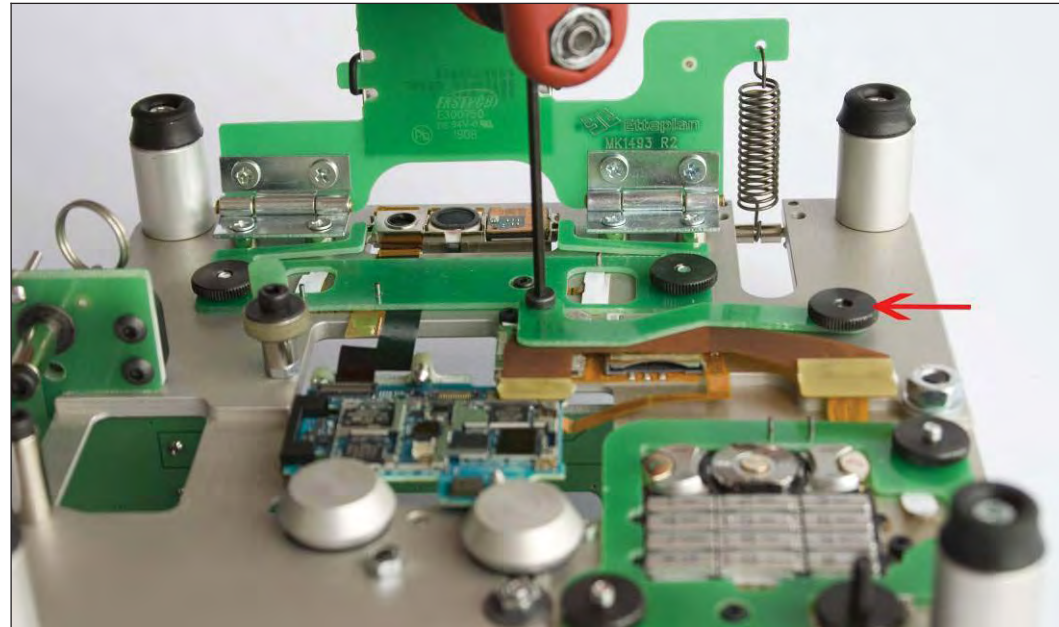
Fixate the key flex cable and SIM/M2 flex module card by tightening the screw and flat nut.
